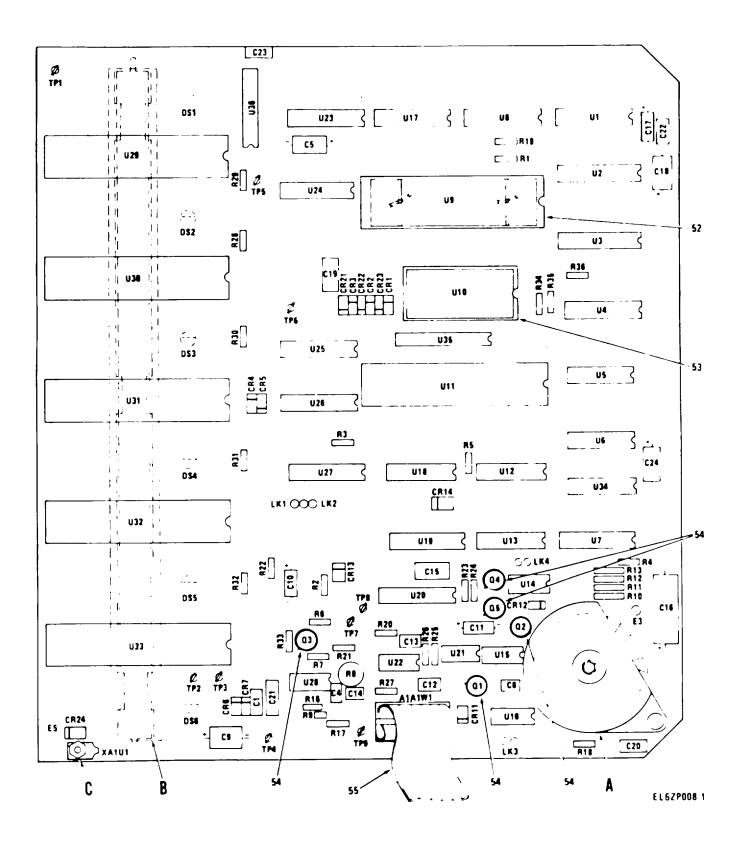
Man Machine Interface Board (Sheet 1 of 3).
